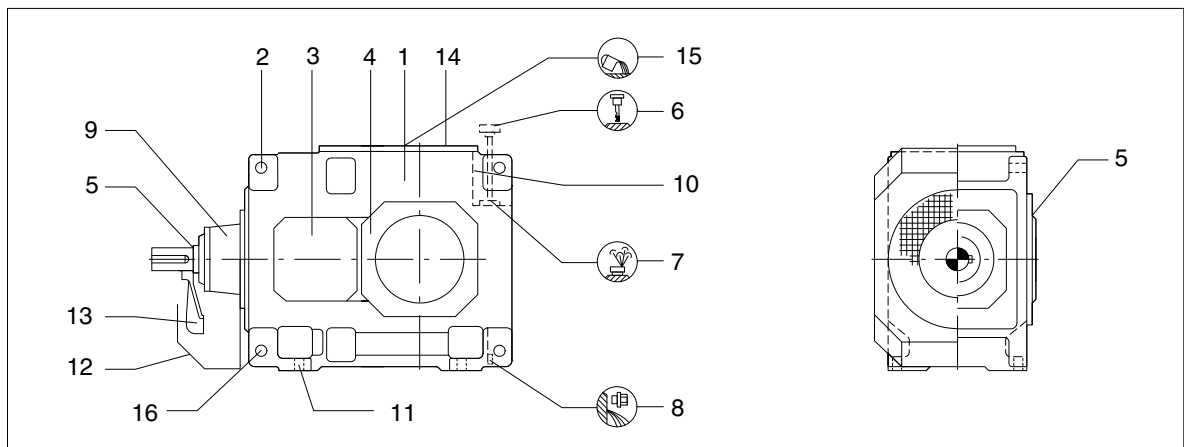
Gear-unit features on gear units of type B..H ≤ 514
